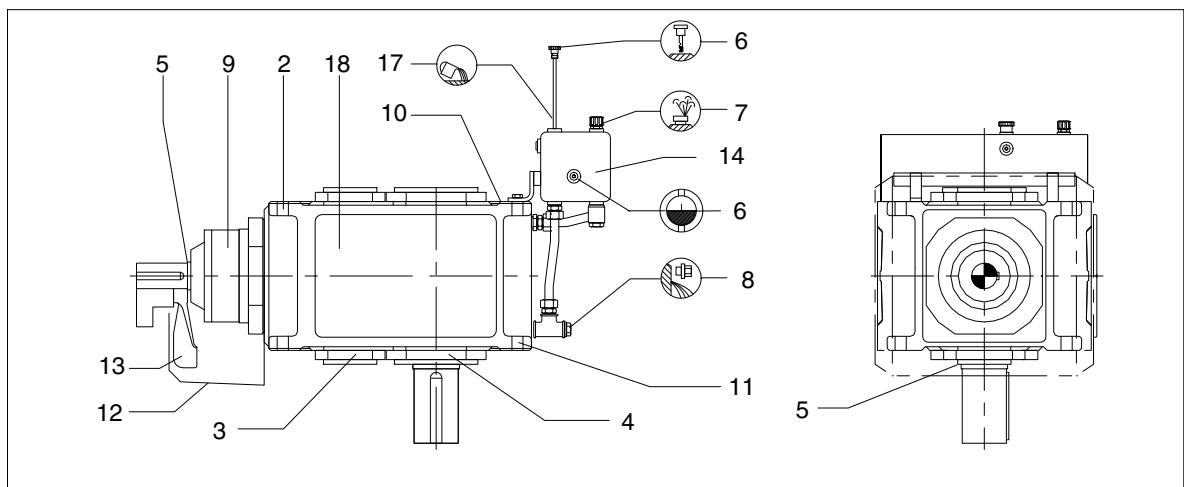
Gear-unit features on gear units type B..V with oil-equalising tank
